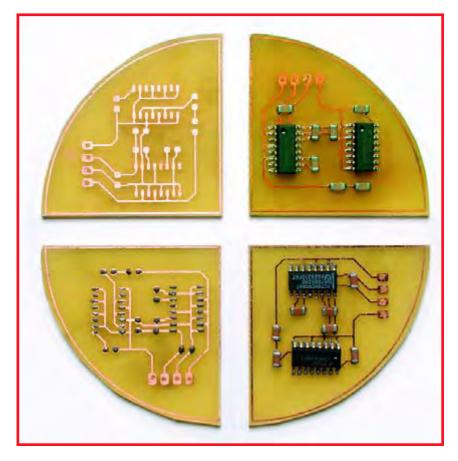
The four stages in PCB form: without solder paste, with solder paste, components not yet soldered, and finished circuit board.
